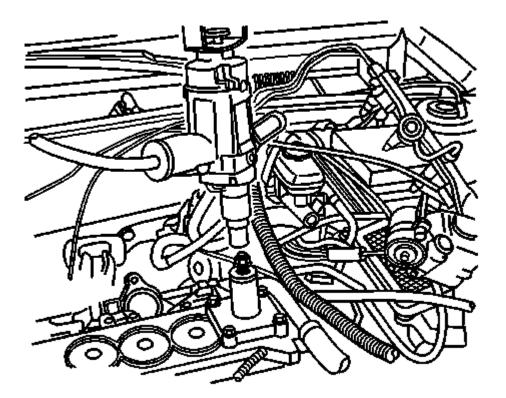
Aligning Trim Tool Assembly Courtesy of GENERAL MOTORS CORP.
